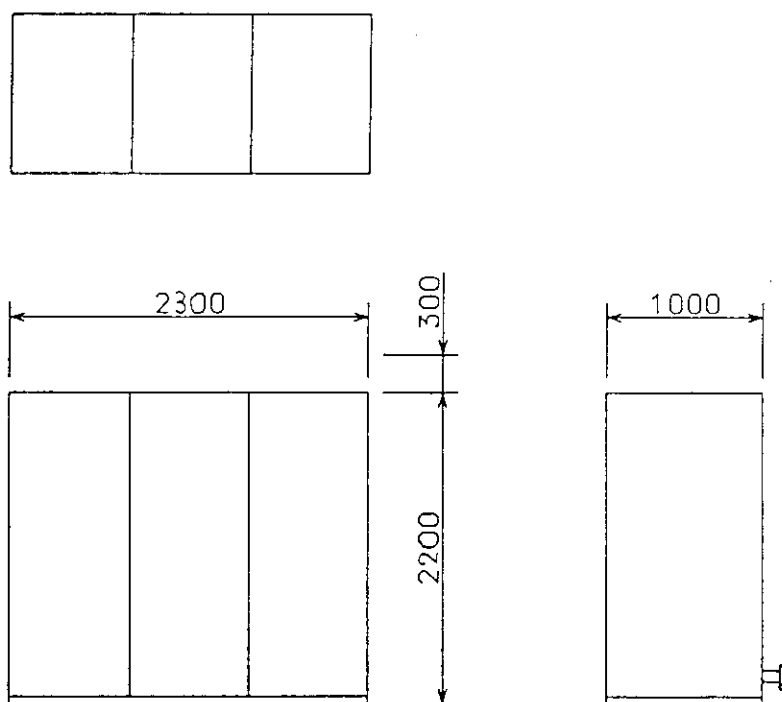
Outline drawings of the pG filter power supply.
